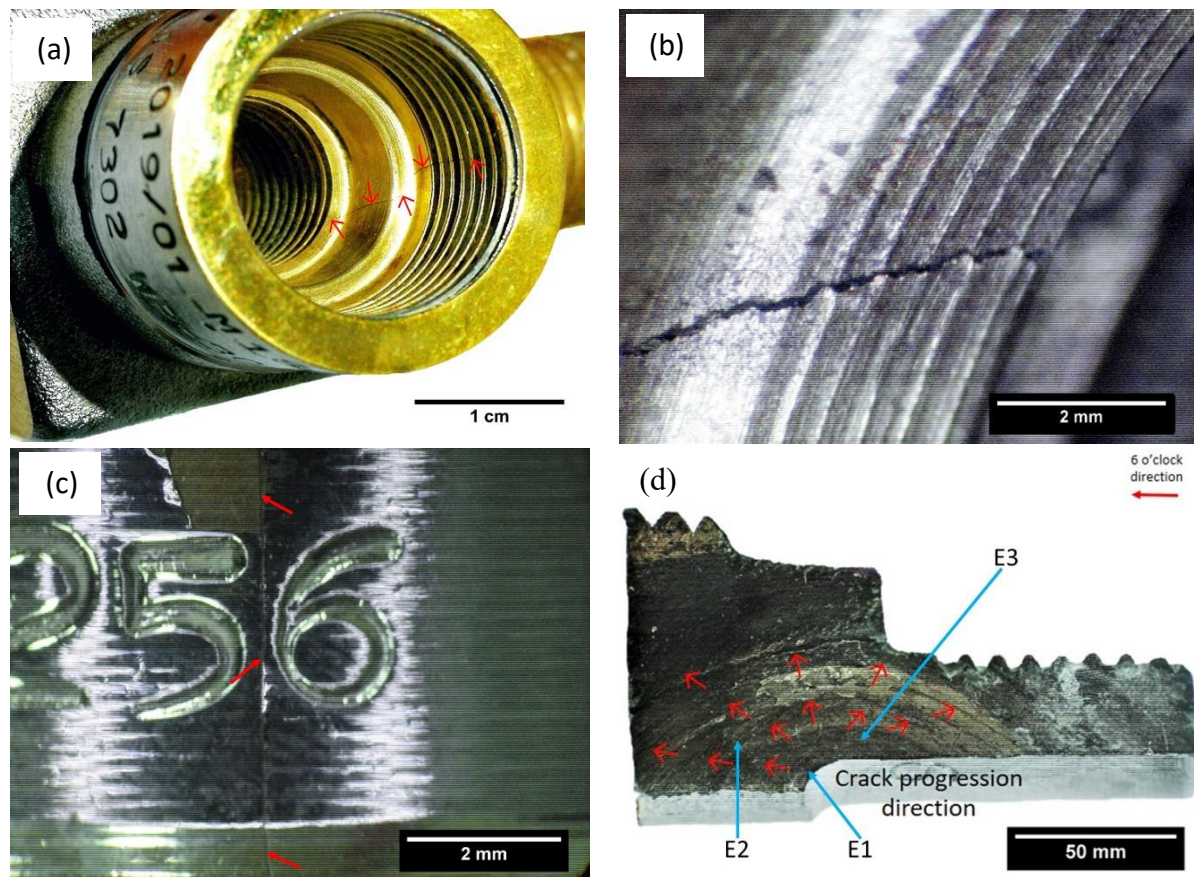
Visual inspection photographs demonstrate the defective marks on the (a) shallow and (b) deeper female thread walls zone, (c) the external body at the chrome-plated area, and (d) the fractured surface on the detached valve body section
